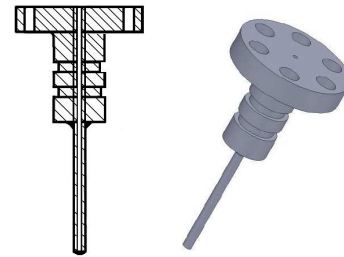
Flange and tube assembly for the thermocouple temperature sensor
